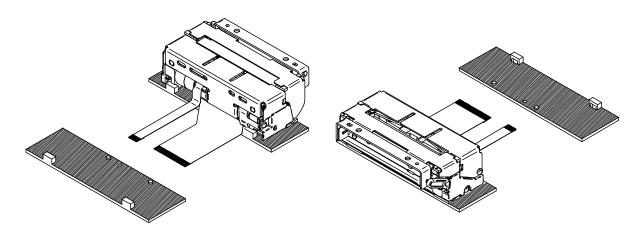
Sample for Positioning and Securing the Printer Main Body (3) (Fixed by the Mounting Part a, a', c and c')
